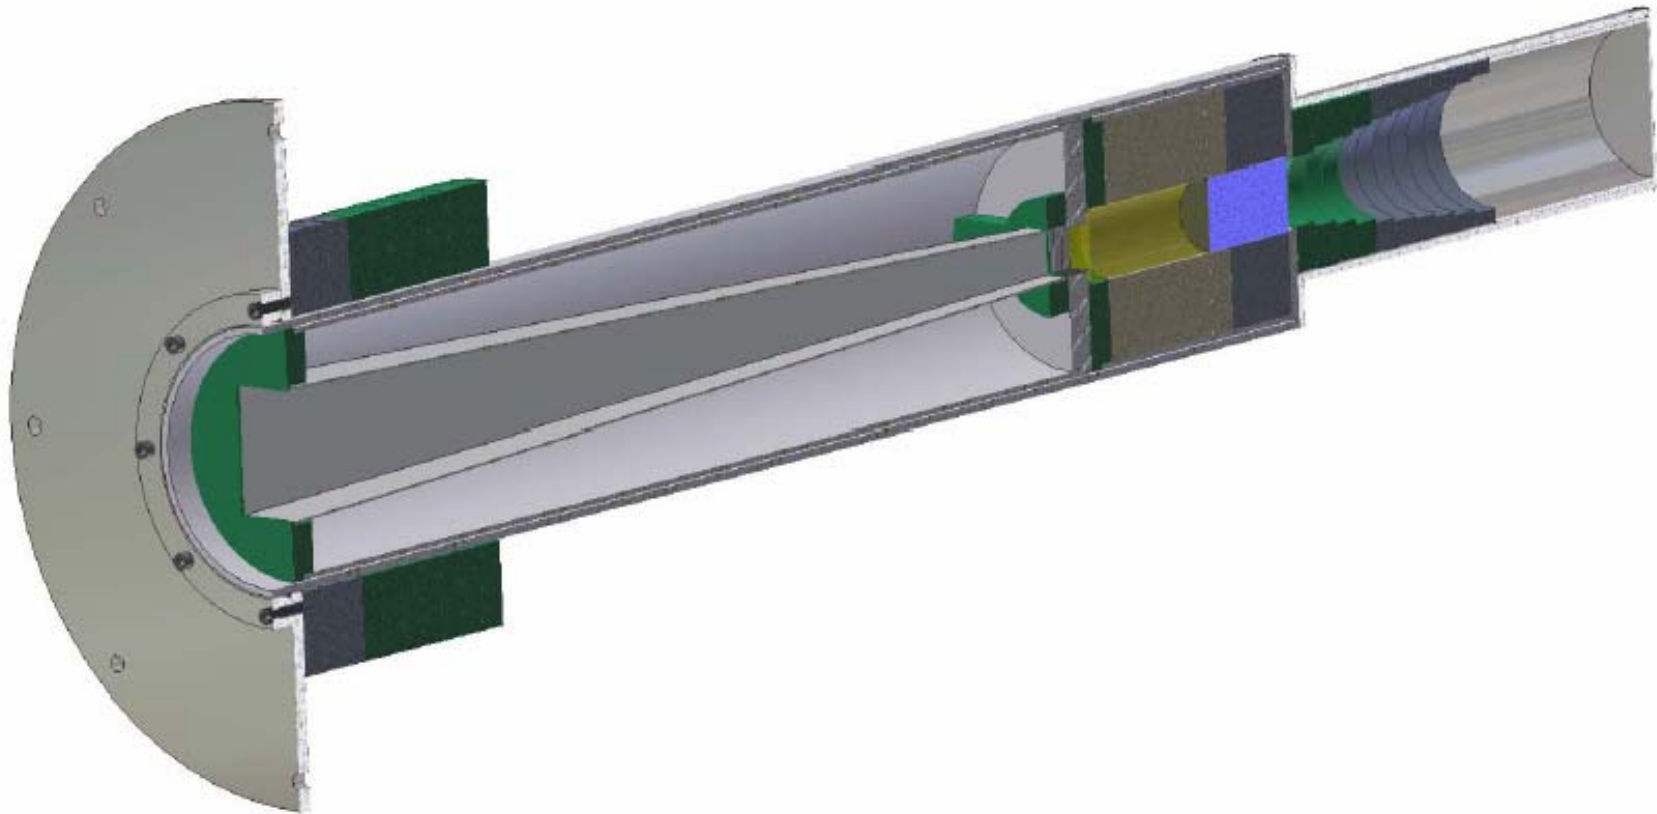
A sectional view of the assembly drawing of the collimator.
